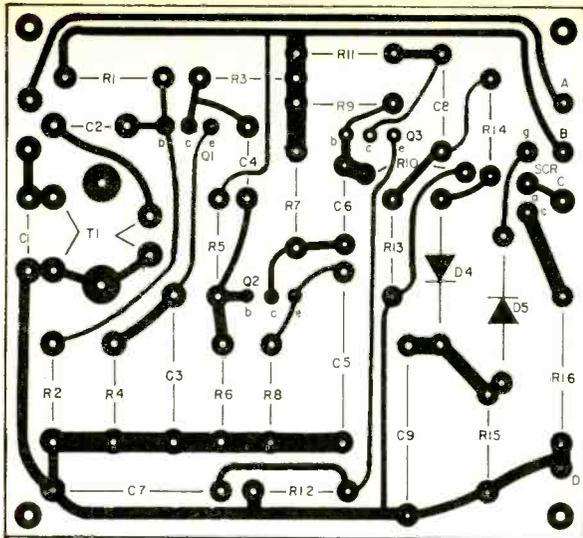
Actual-size printed board for the demodulator. This also shows where the various components are to be installed on the finished circuit board.
